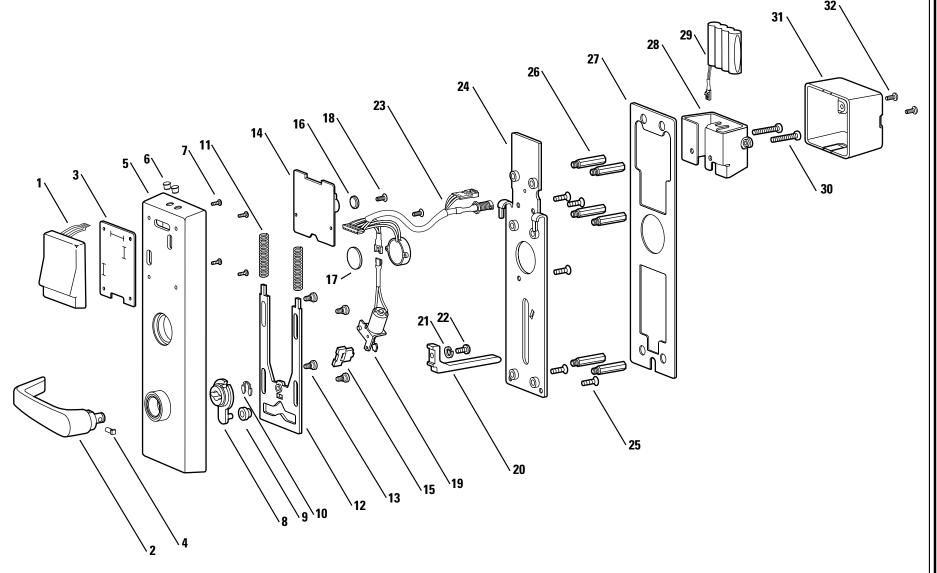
B.A.S.I.S. smart card reader and trim exploded diagram (Precision Hardware—rim type shown)
